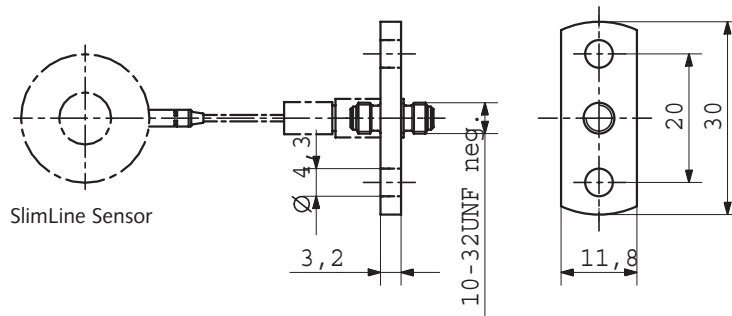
Coupling Type 1729A1 with steel support; connector KIAG 10-32 UNF neg. on both sides.
